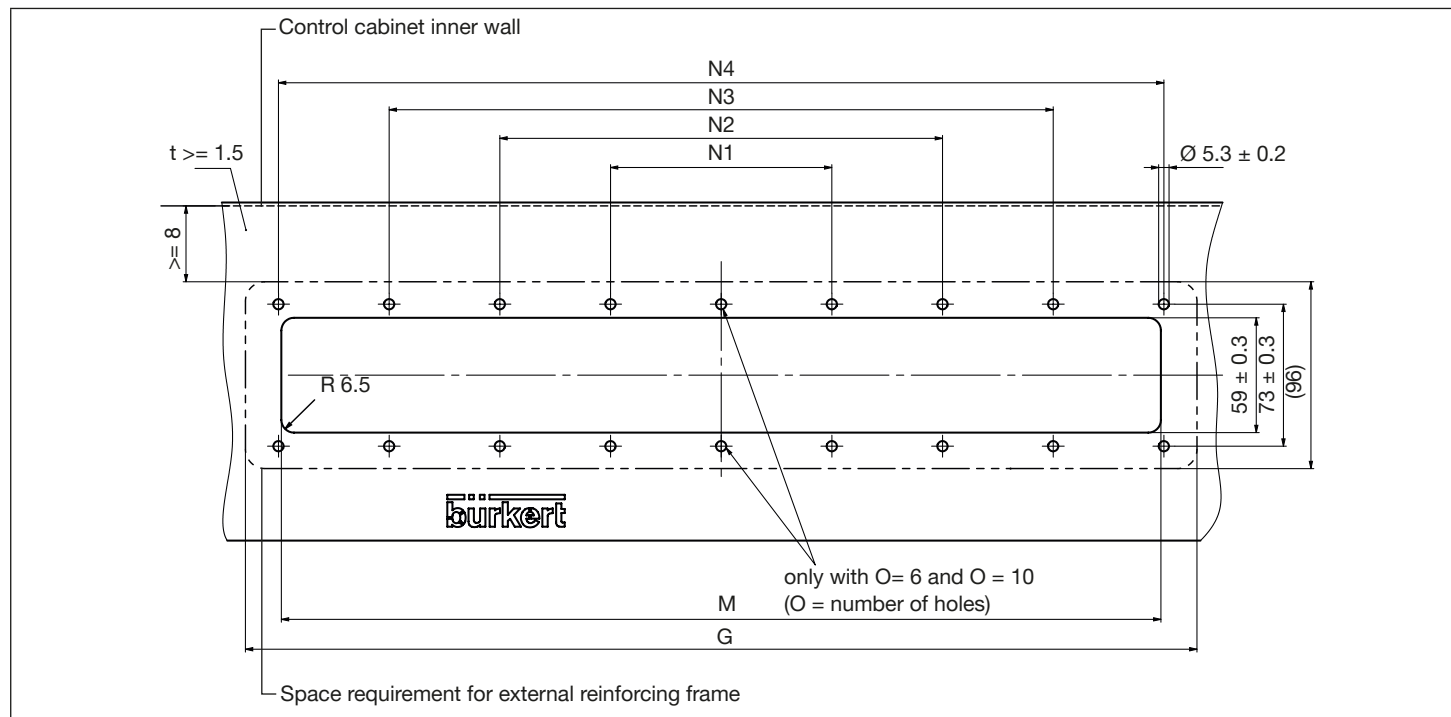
Flange pattern AirLINE Quick – for dimensions, see table [Tab. 1 on page 18](#)
